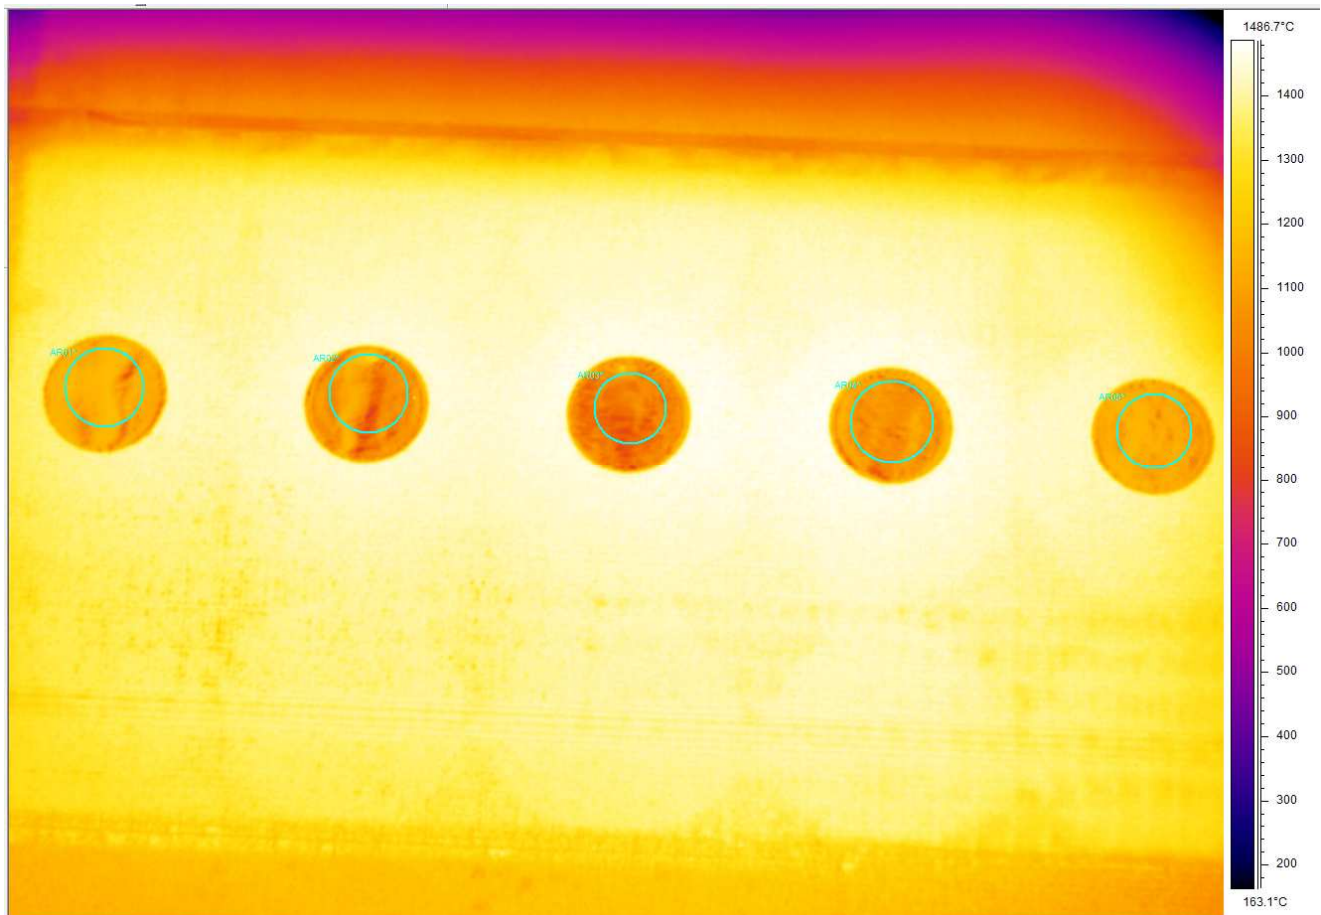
IR IMAGE OF ELEVATED BUILD CYLINDERS AT Z= 87.22 MM
